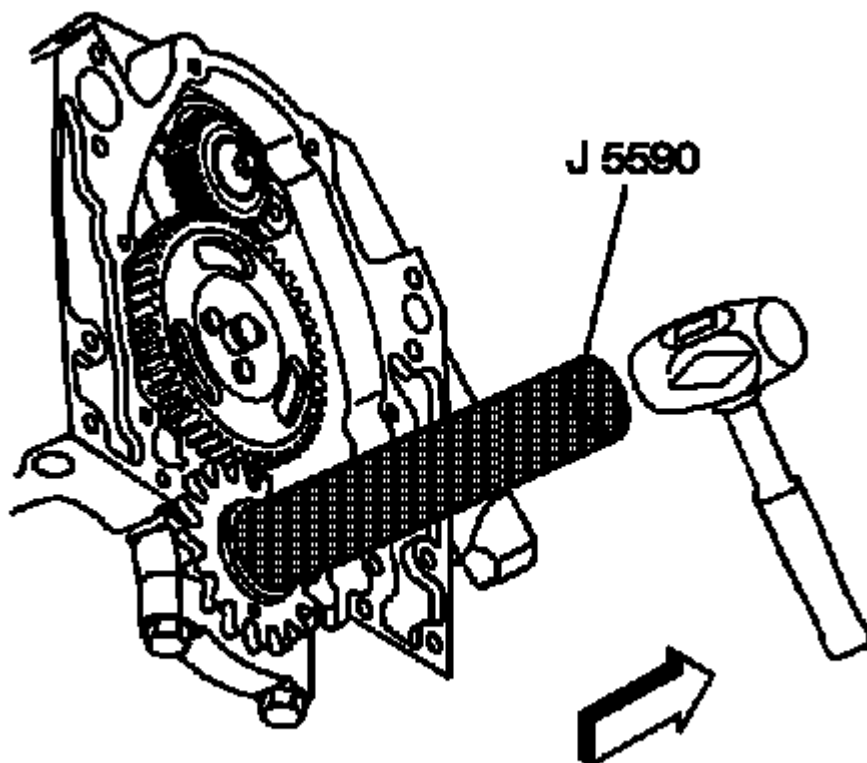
View Of Crankshaft Sprocket & Special Tool J 5590
